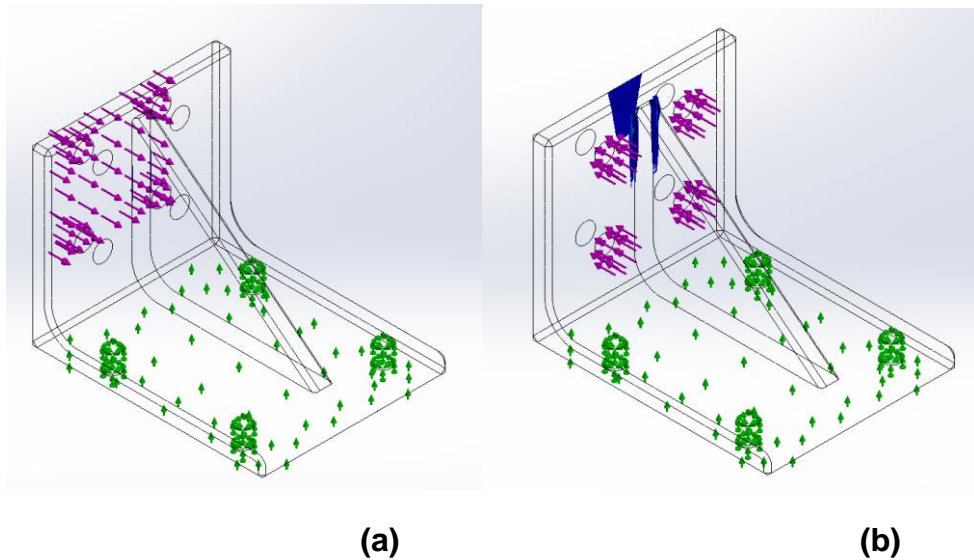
Connector Block with angle support welded to the angle bracket
